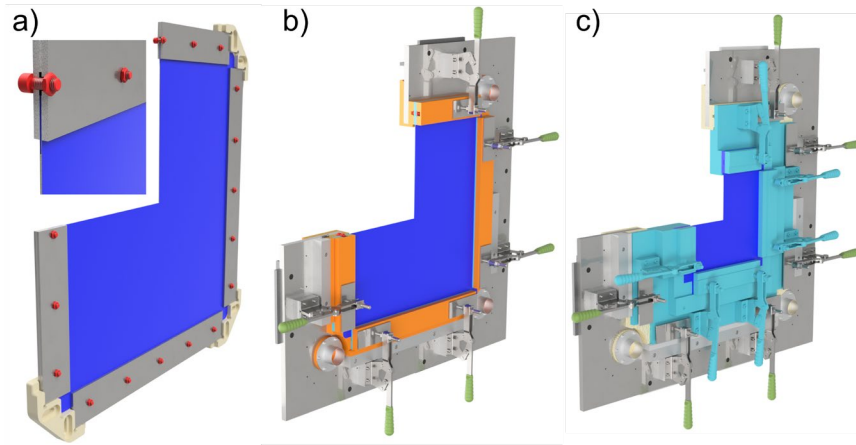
Clamping system: a) clamped layout, b) secured layout, c) reduction module
